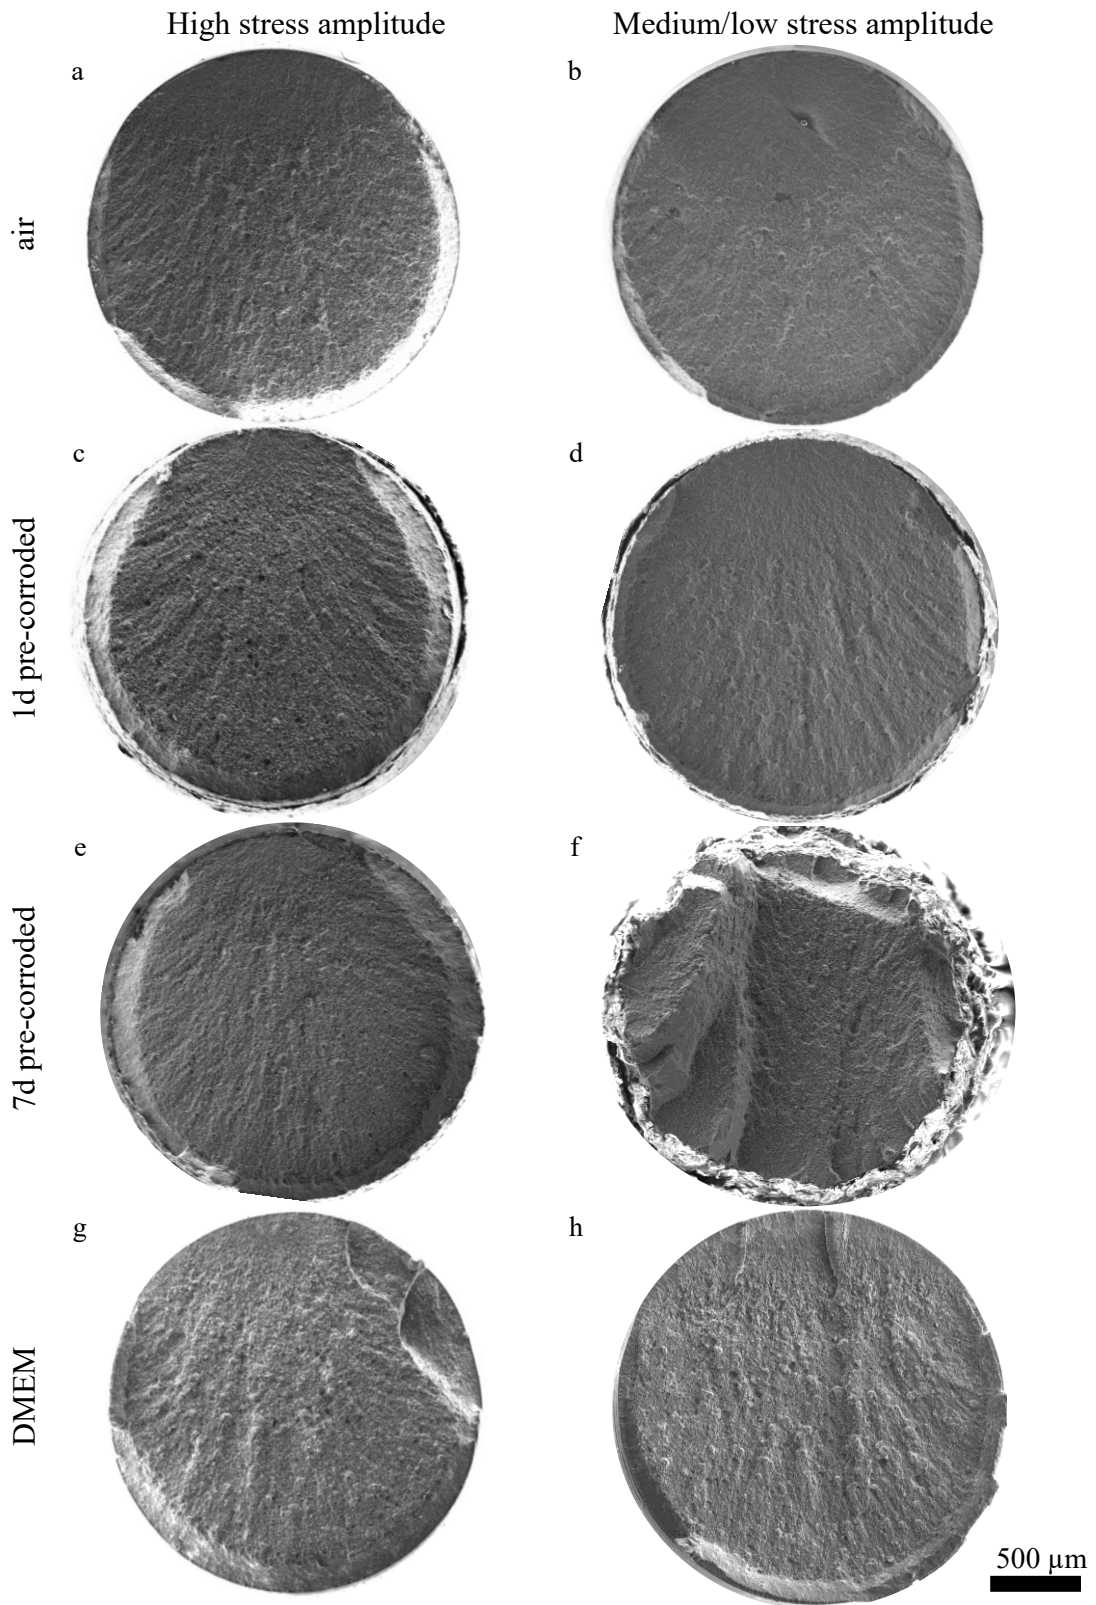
Fracture surfaces of WE43 specimens cyclically loaded in air, in air after pre-corrosion for 1 or 7 days in DMEM or in DMEM, adapted from [121].
